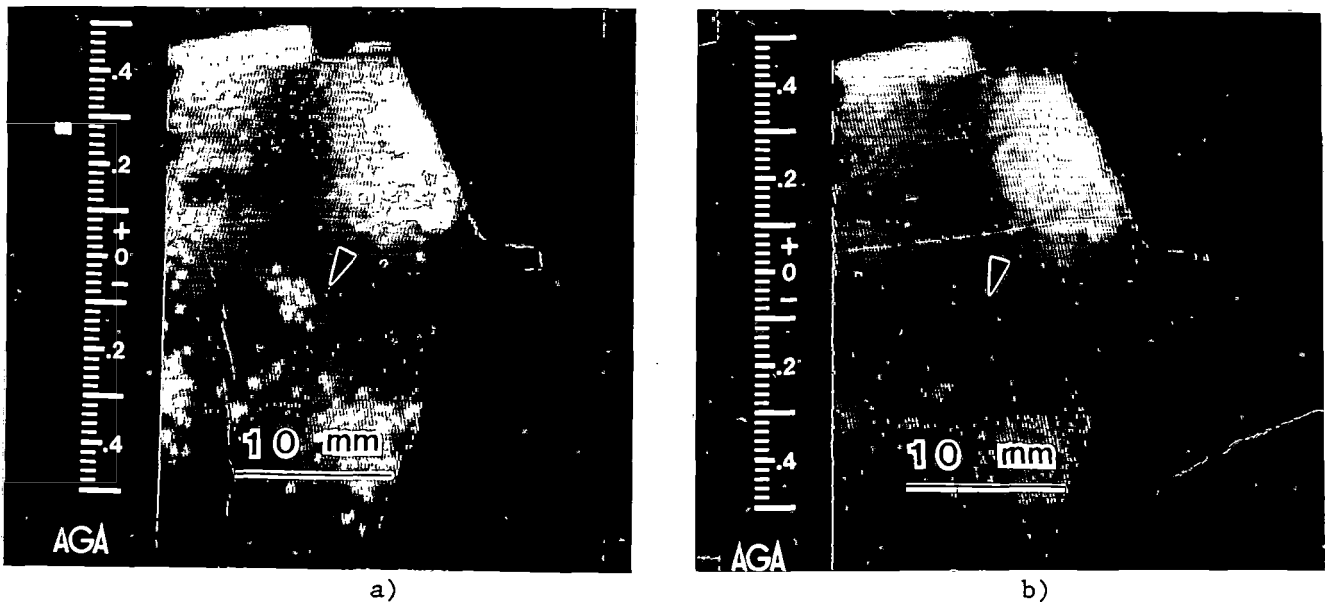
Thermograms showing crack growth during the fatigue process. The fatigue crack, a, and after the crack has propagated, b.
